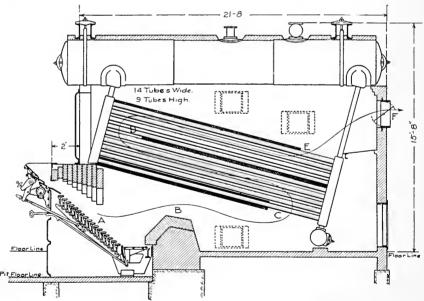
Babcock & Wilcox 220 H. P. Boiler Equipped with Roney Stoker
